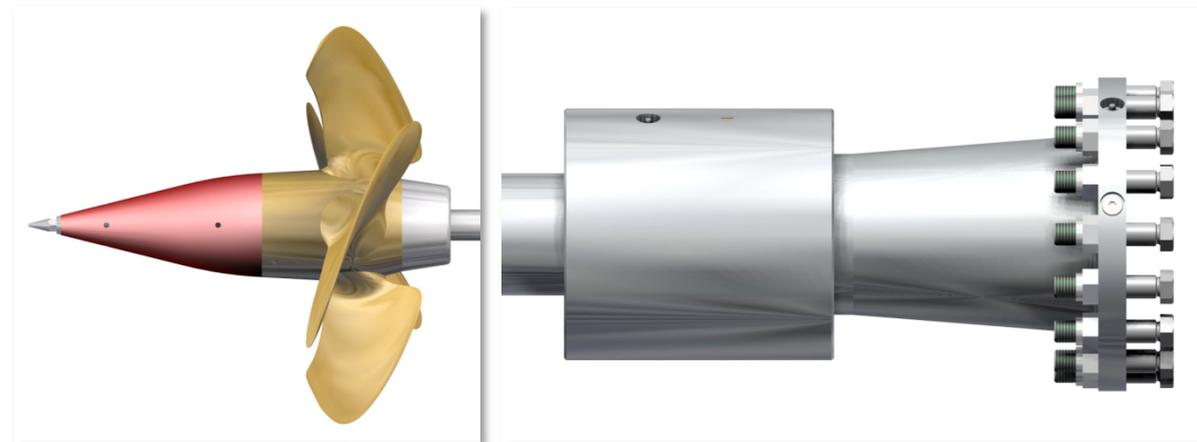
Cross section of propeller and shaft (above) and outside picture of propeller and flange coupling.
